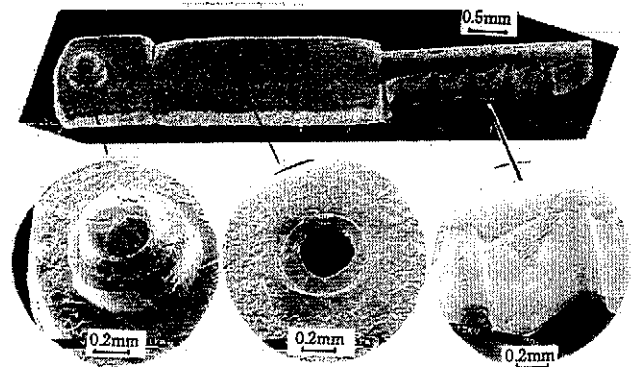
Formed jaw by press machine developed. (Work material:copper)
